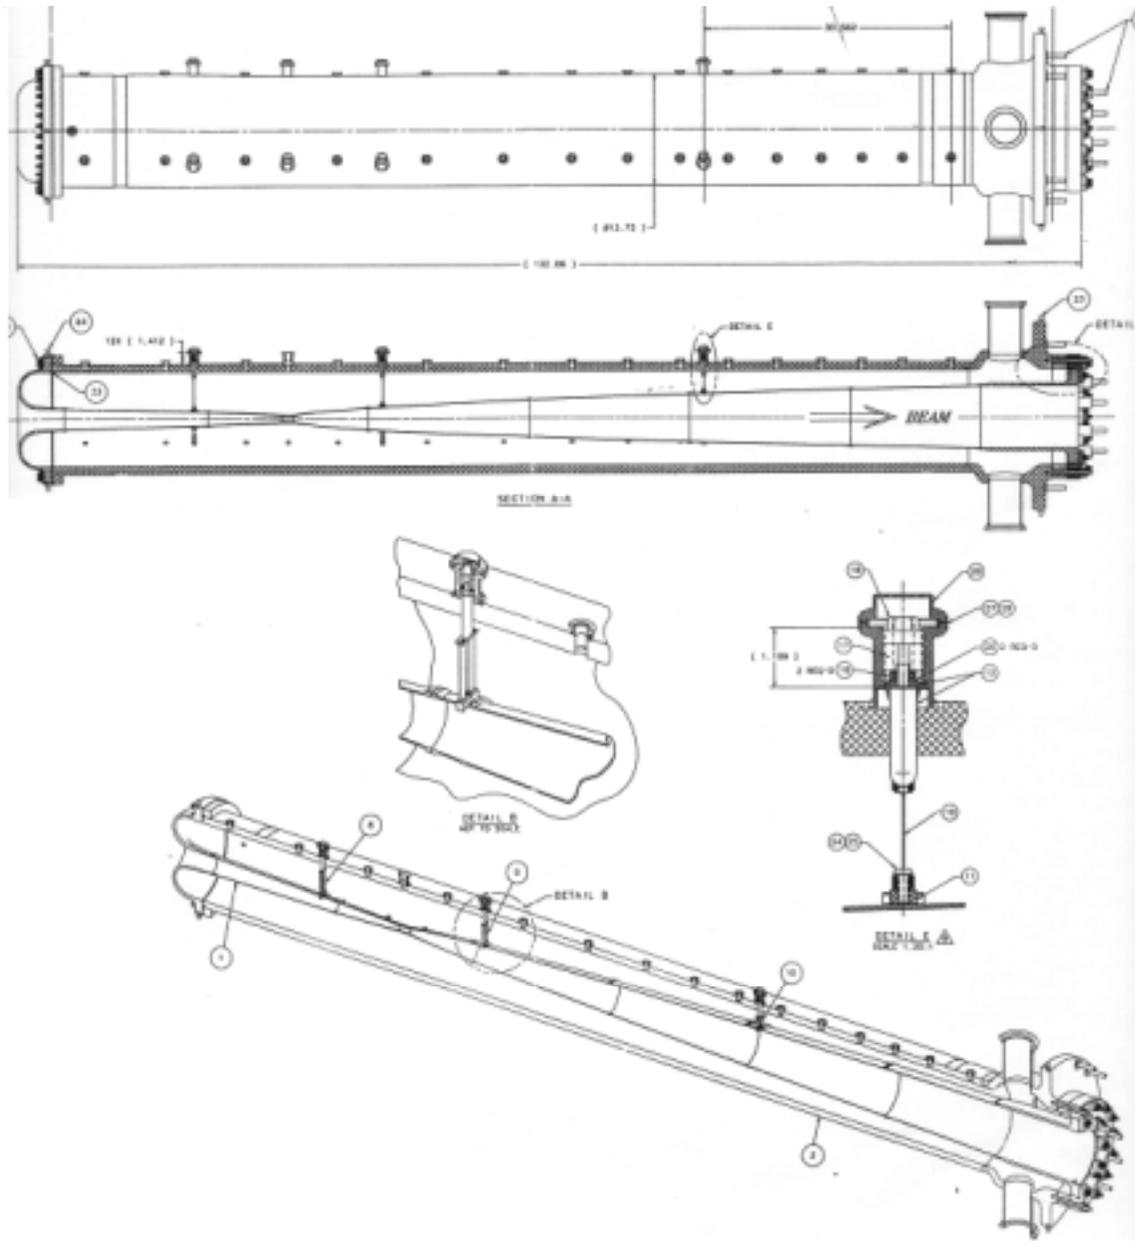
Horn 1 assembly drawing, with detail of inner conductor support spider. (From drawing 8875.112-ME-363092)
